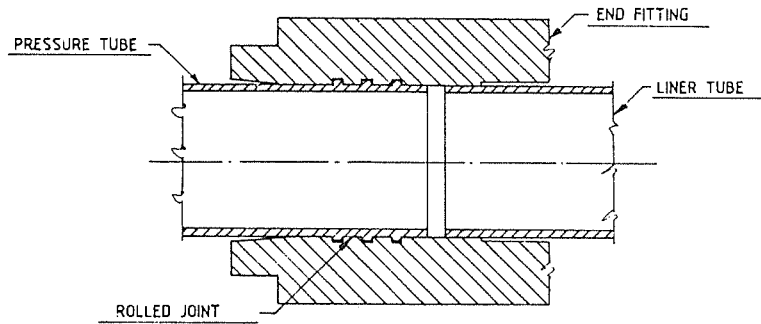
PRESSURE TUBE TO END FITTING ROLLED JOINT
